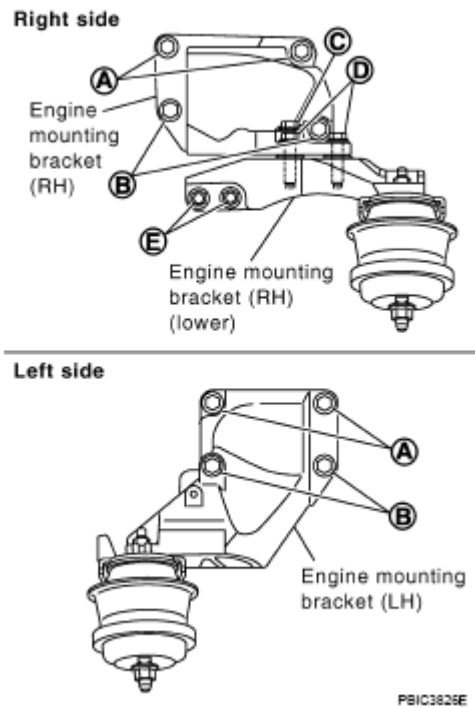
Identifying Engine Mounting Bracket Bolts Tightening Sequence
